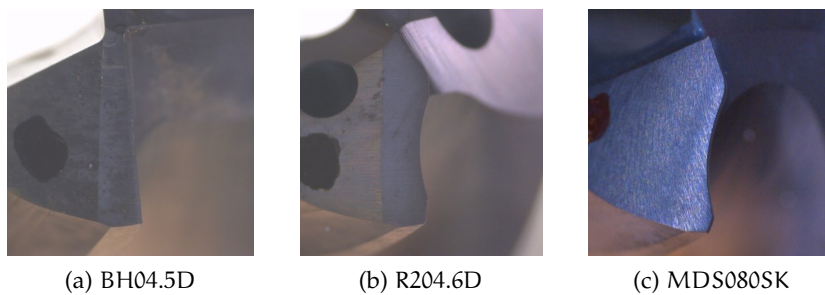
Tool geometries used in end-of-life tests on Inconel 718
